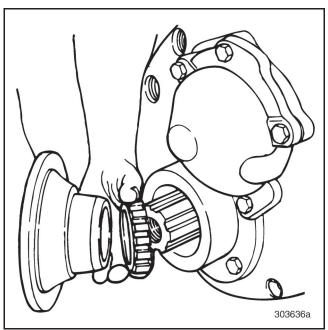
Removing Output Yoke and Speedometer Tone Wheel
